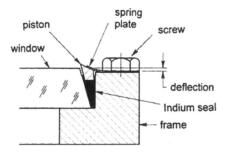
Detail view of the pressure-loaded indium seal for the window assembly of Fig. 5.3. (Adapted from Haycock et al.³)
